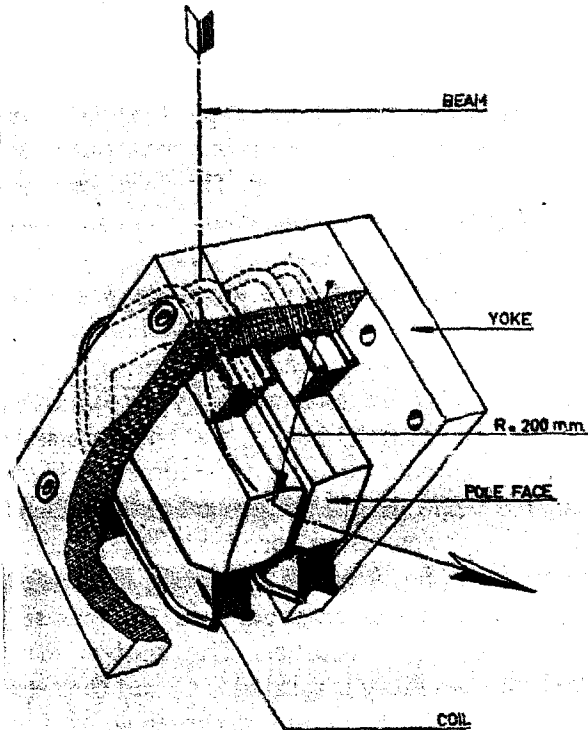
Cutaway drawing of the magnet construction. See section 2.3 of the text.
